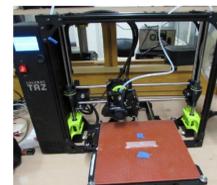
LulzBot TAZ 6 3D printer with printed specimen
